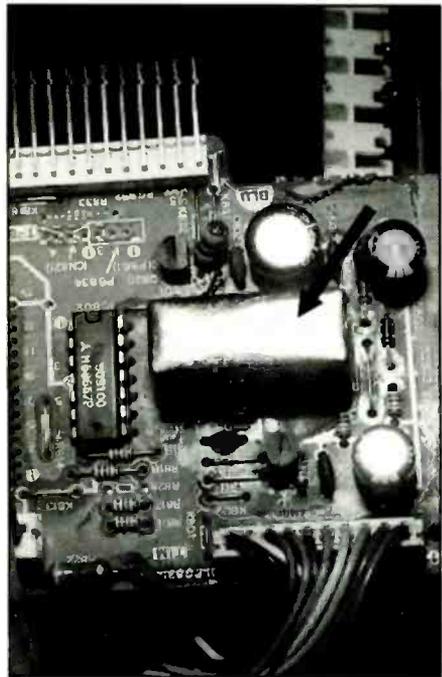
In later designs, the discrete component dc/dc converter has been replaced by a module. Replacement modules have a heat sink on top to improve heat dissipation and reduce failures of this part.
